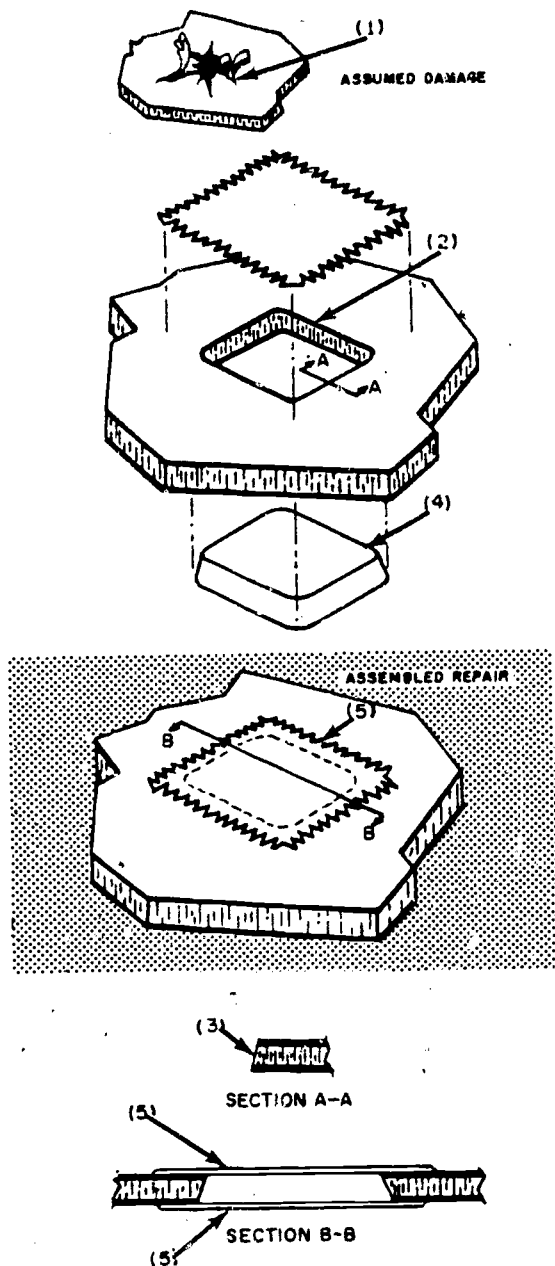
illustrates one flush type balsa wood core repair that is used on puncture damages larger than 1 inch. To make this type repair, cut out the damaged area as previously described. After the damaged area has been cut out, the inner metal face is cut back 1 inch and the core material is removed. (See (3) figure 2-11.)
